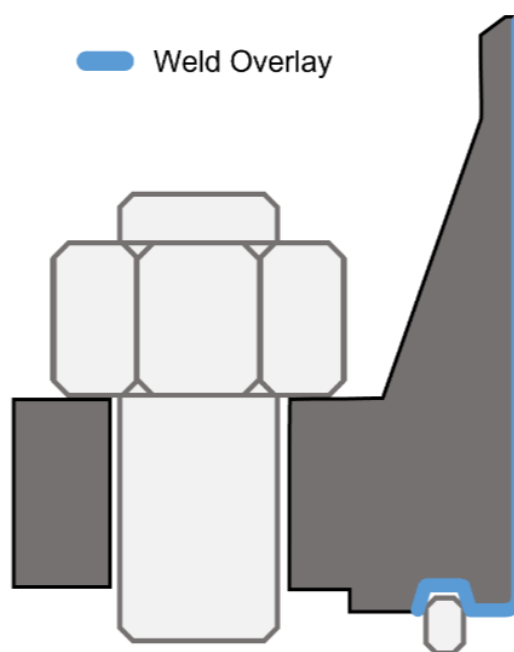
Equipment with internal weld overlay and RTJ flange.
